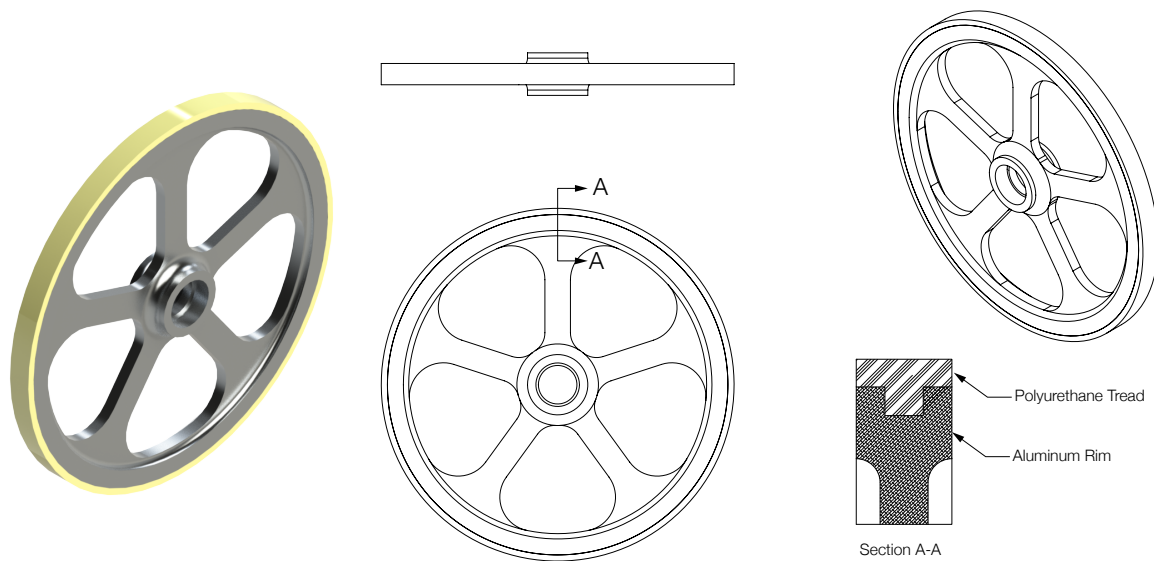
Wheel Concept 1 | Machined Aluminum Rim - Render (Left) and General Drawing (Right)
